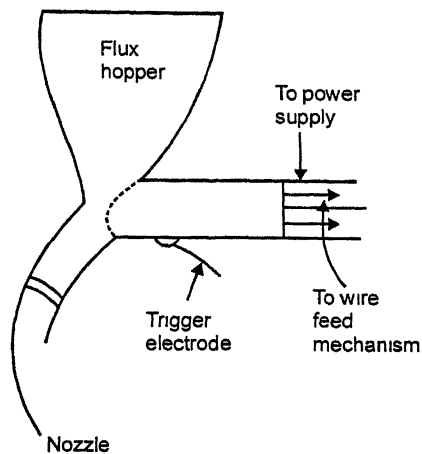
Apparatus used in manual submerged arc welding.
